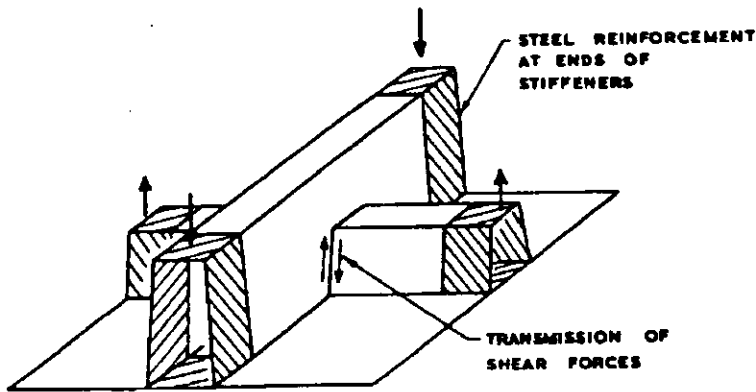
Bulkhead-shell joint geometries in sandwich construction.
